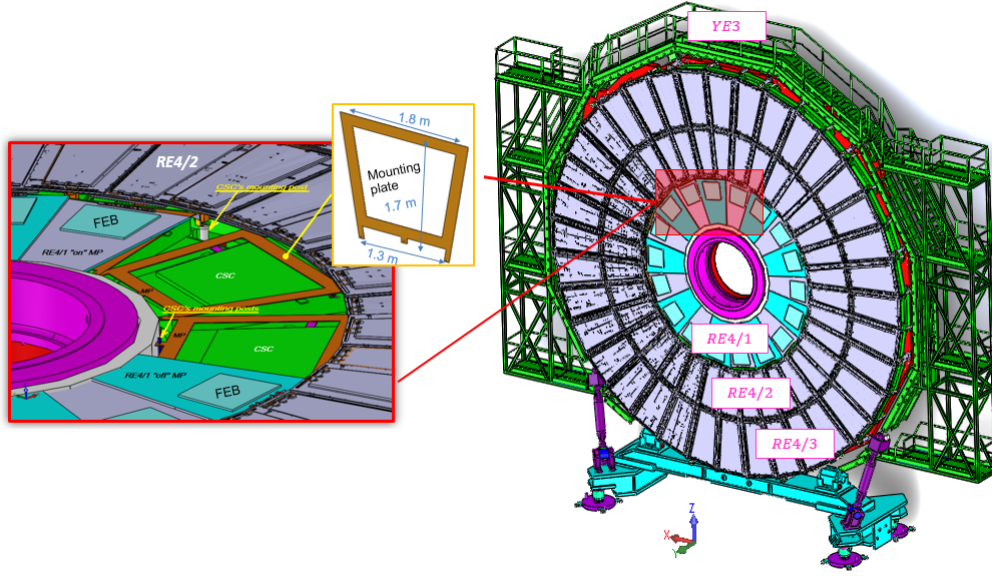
3D-drawing of the RE4/1 chambers fixed on the YE3 (right). Bottom left: Schematic view of the RE4/1 chambers mounted on the mounting plate. Top left: Schematic layout of the mounting plate.
